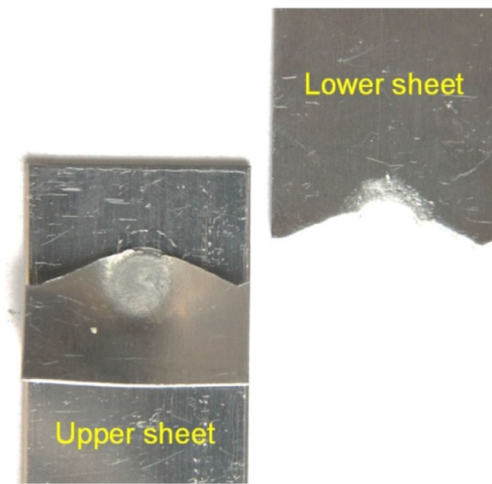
Illustration of the failure mode of a joint welded according to the following parameters: $n = 2400$ rpm, $g = 1.5$ mm, $t = 3.5$ s
